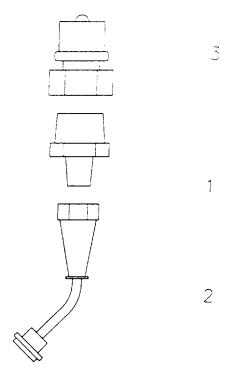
M-1 Extinguisher or Schrader Valve Adapter Repair
